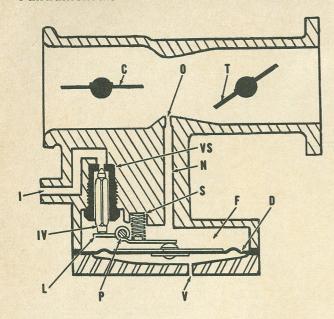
Cross-section drawing of basic design diaphragm type carburetor. Atmospheric pressure actuates diaphragm (D).
